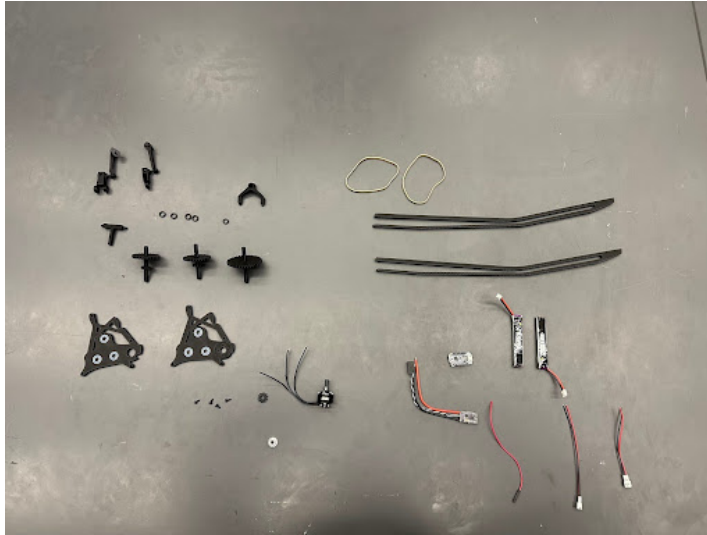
Most of the parts laid out, I've already put the bearings into the holes, just smack them with a mallet to go in. This tutorial is slightly outdated but differences should be clear.
